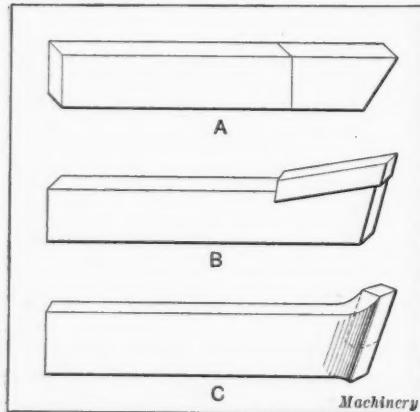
A, Butt-welded Tool; B and C, Arc-welded Tools
